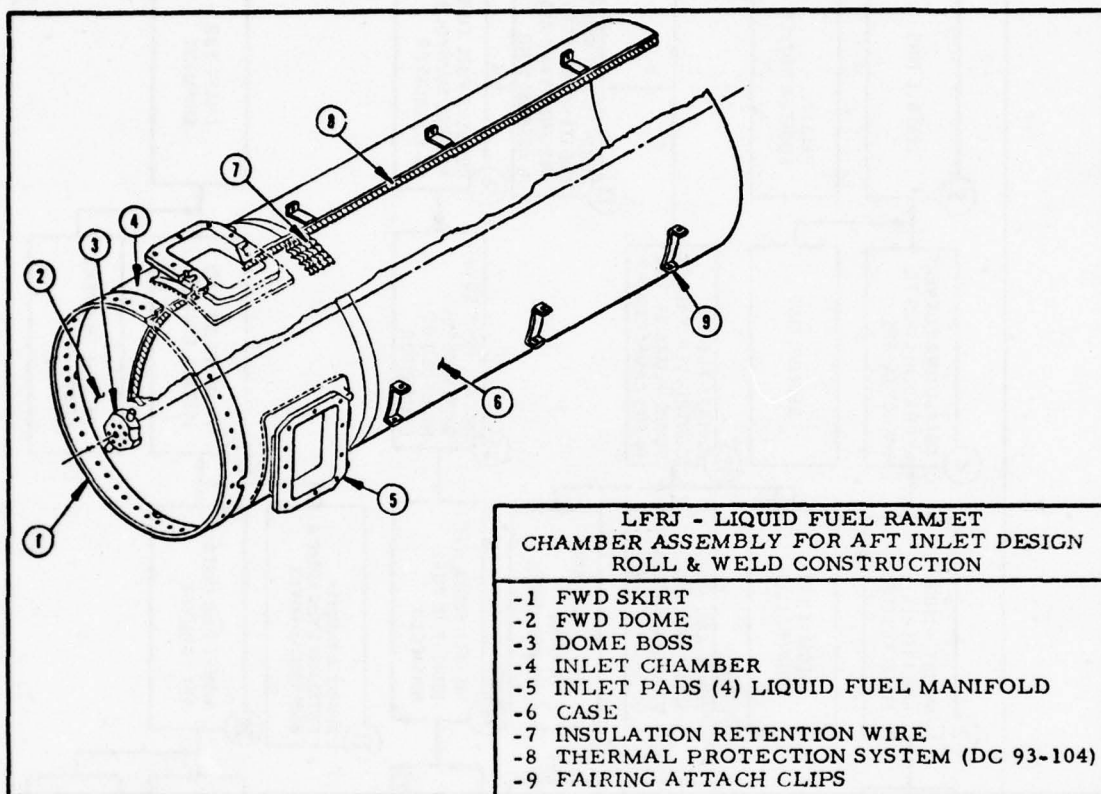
CHAMBER ASSEMBLY FOR LFRJ AFT INLET
